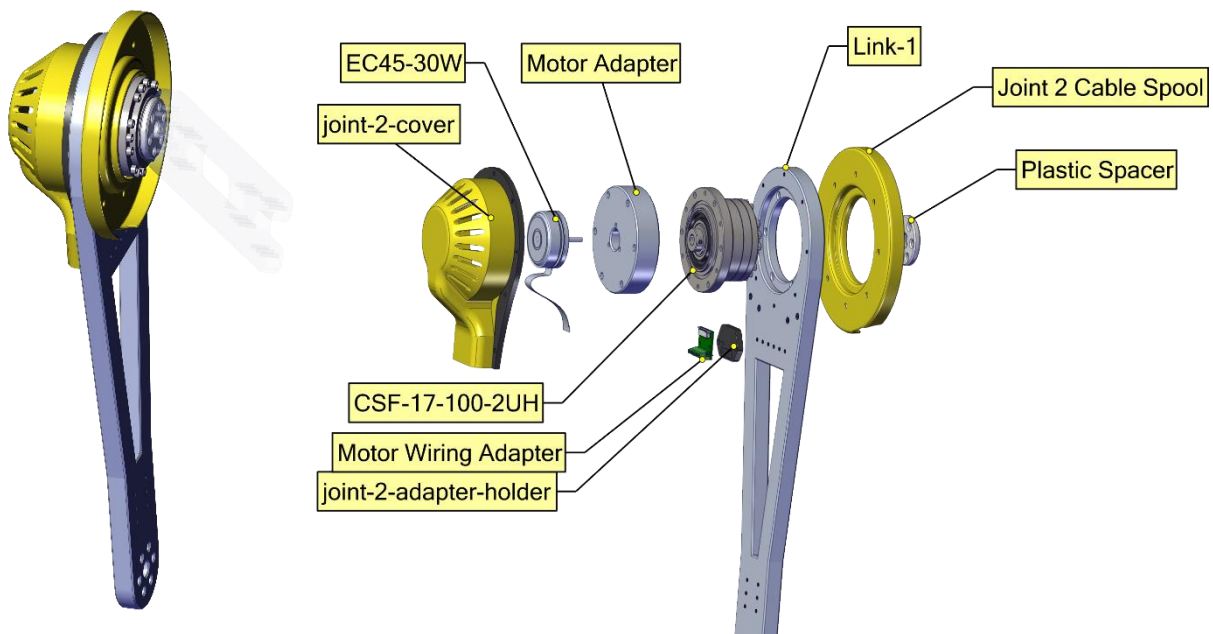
Link-1 assembly (Left), Exploded view of Joint-2 (Right)
